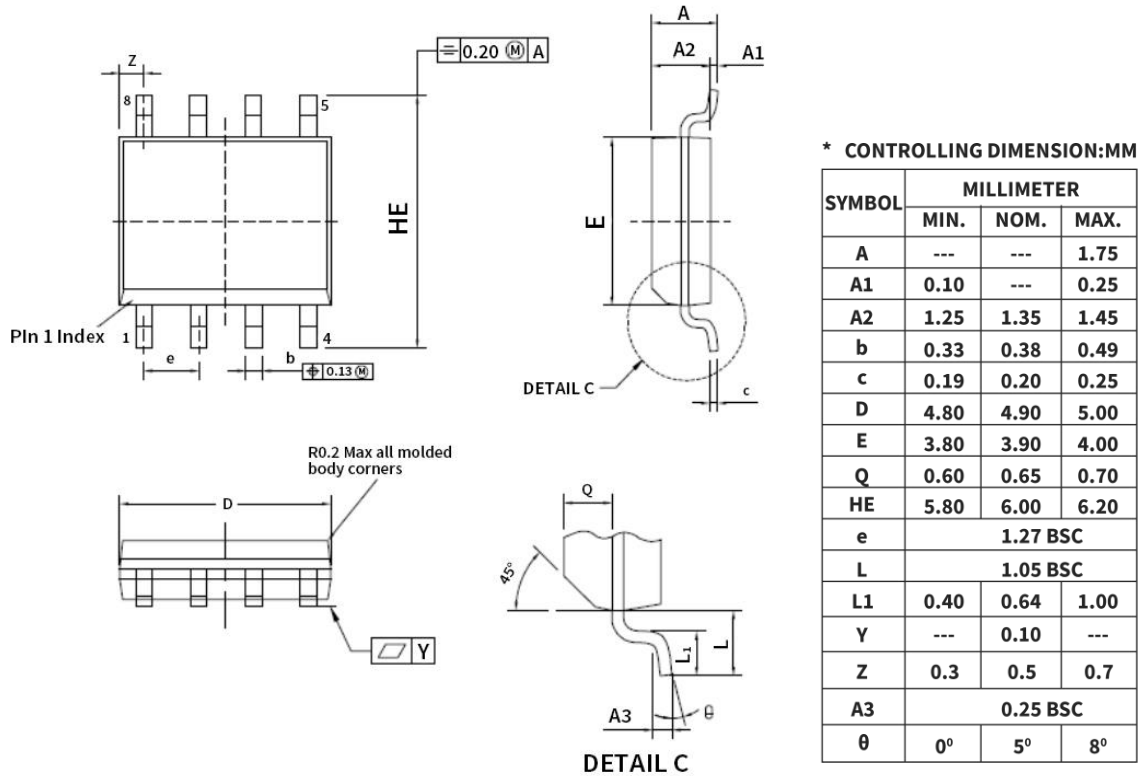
SOP8 Package Shape and Dimension in millimeters
